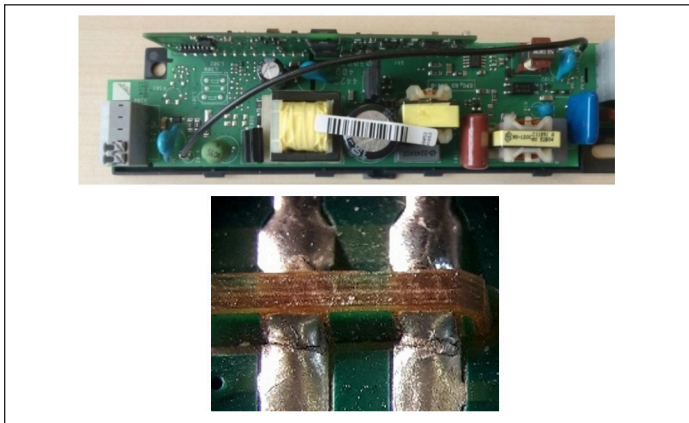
board to board solder joint connects for mother-daughter board PBA configurations (top), cracked board-to-board connections (bottom)
